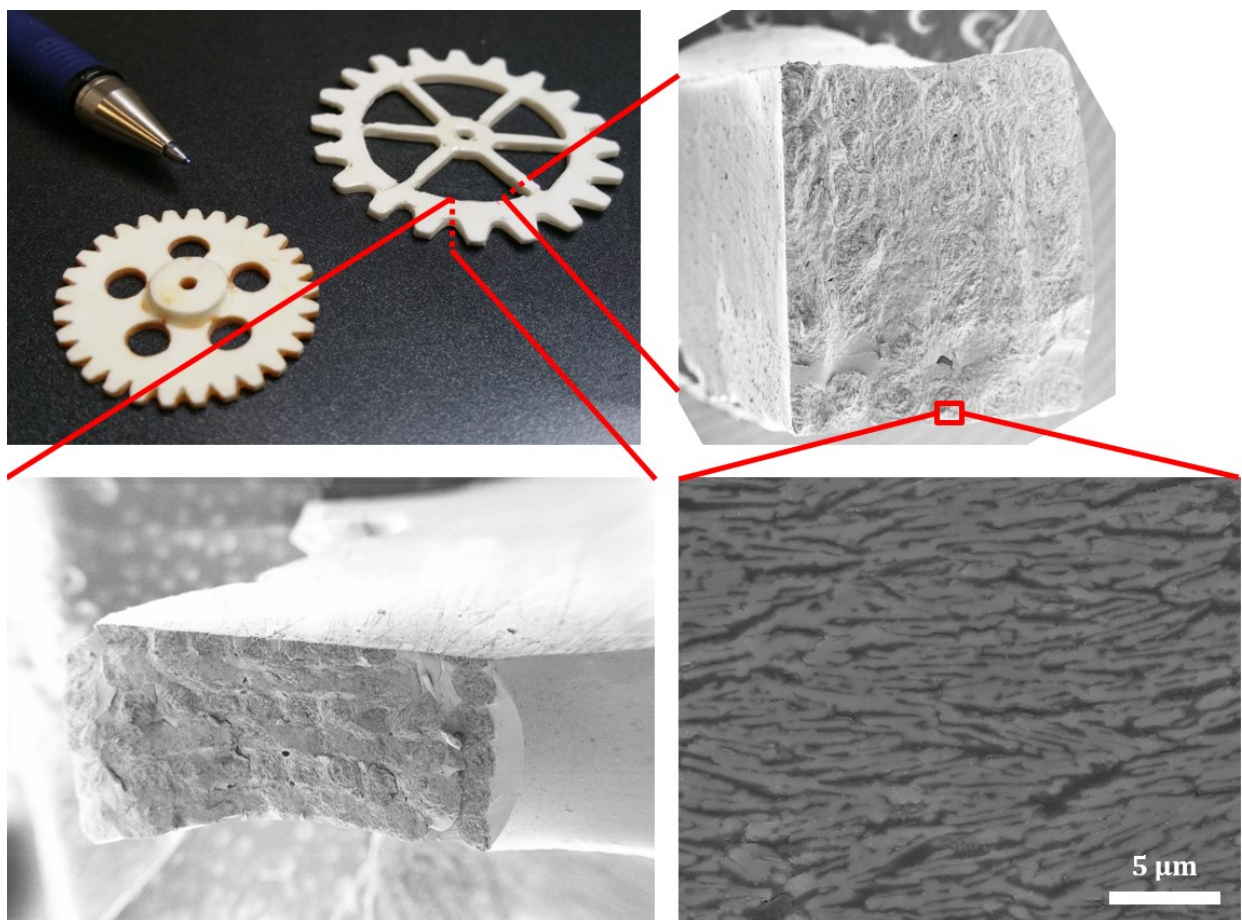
Two composite cog wheels printed from CAD files. SEM images of fracture surfaces of these parts reveals the hierarchical structures of the aligned platelets.
